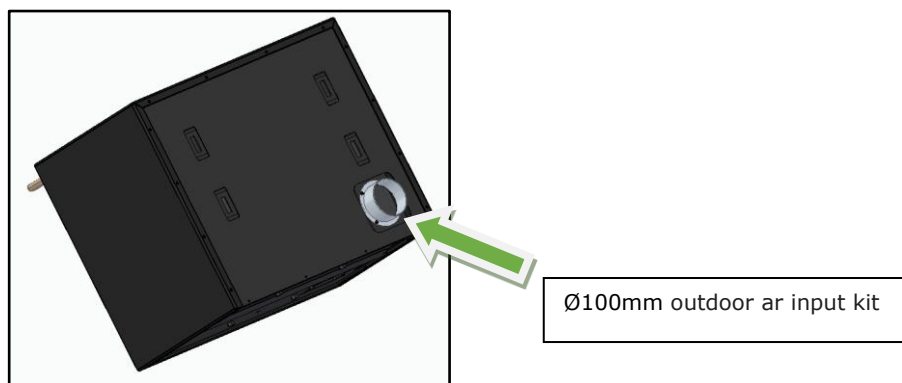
Connection options to the "Outdoor Air Inlet Kit" equipment
